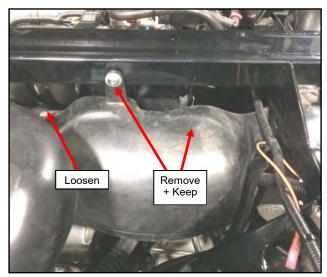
(Remove Intake Duct Assembly, Back View)
